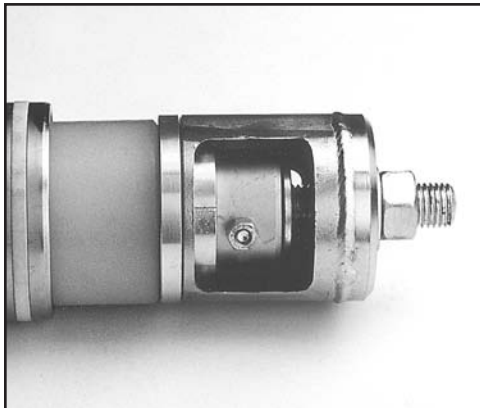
DISASSEMBLY TOOL IN PLACE ON CONTROL TUBE
